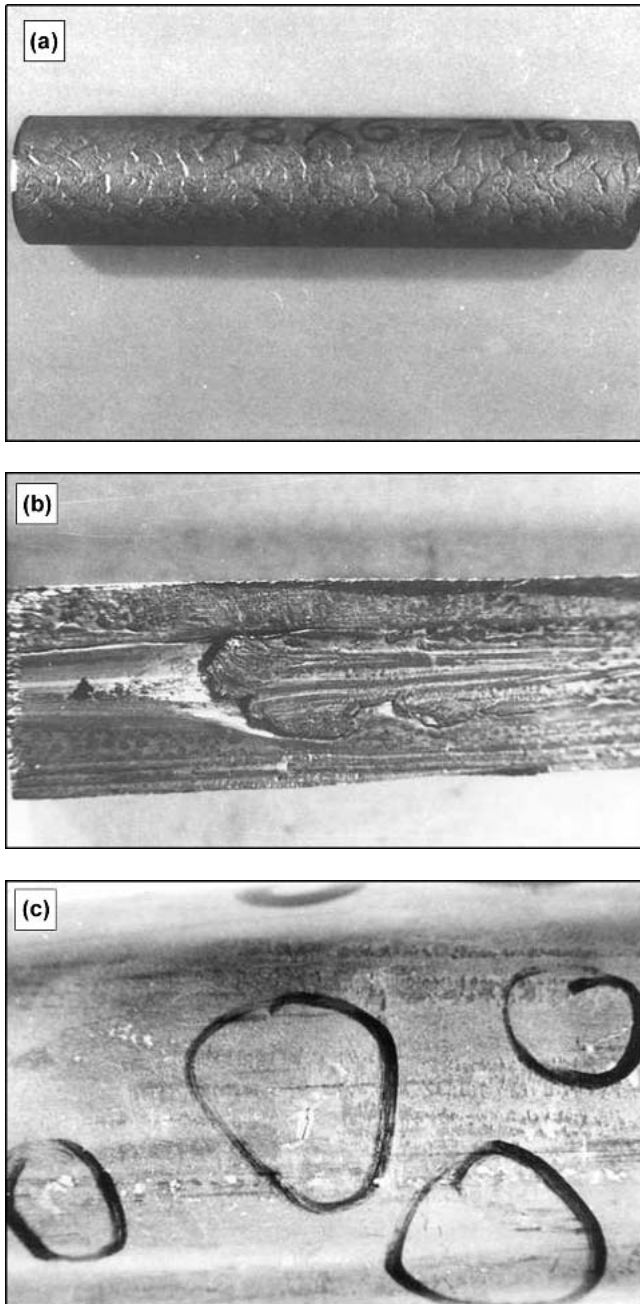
(a) Extruded stainless steel 316L tube with surface defects, (b) transverse cracks on the tube, and (c) hairline cracks on the pilgered tube
